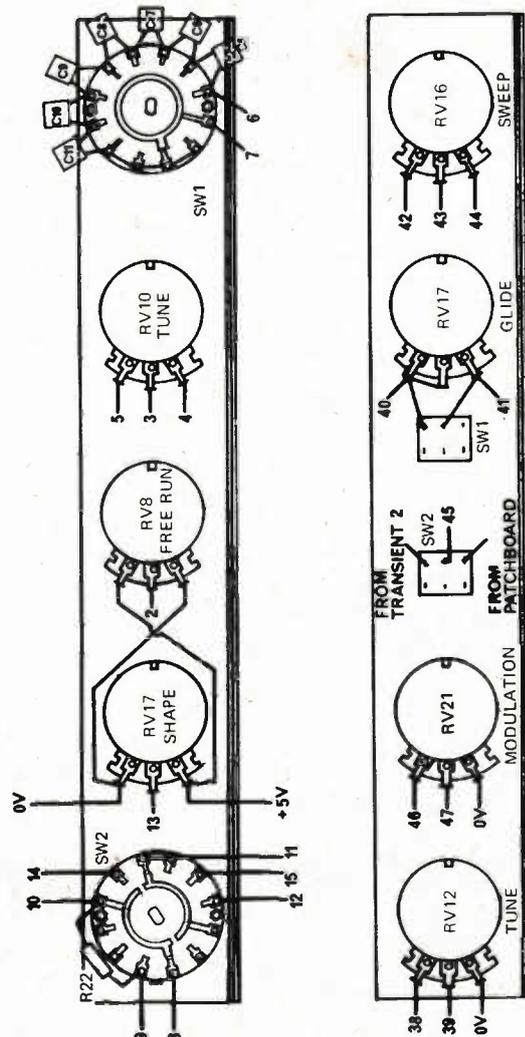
Wiring to switches and potentiometers of oscillator - top wafer of SW1 only shown refer to Fig. 14.
